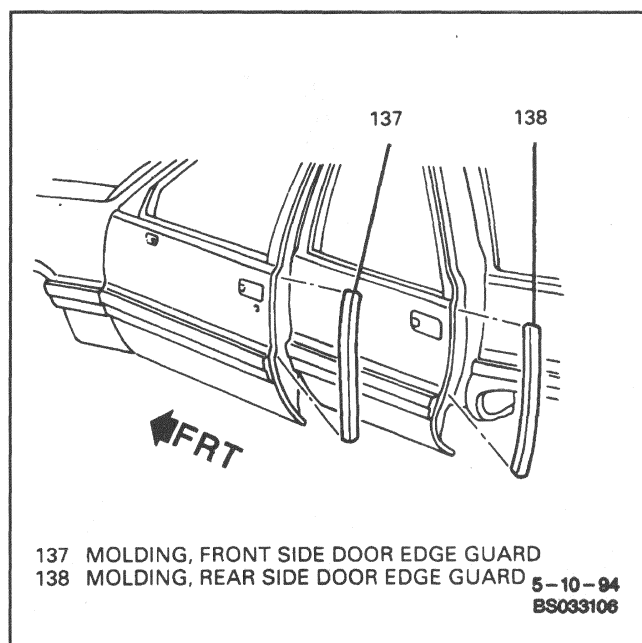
Front and Rear Side Door Edge Guard Moldings
